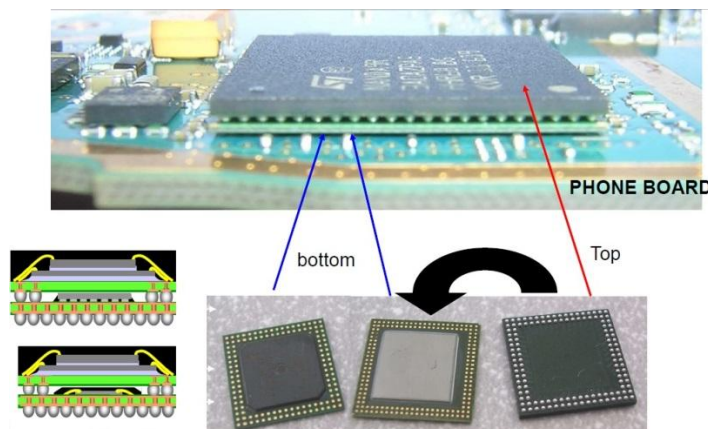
PoP Package PCB Mounting (STMicroelectronics)
